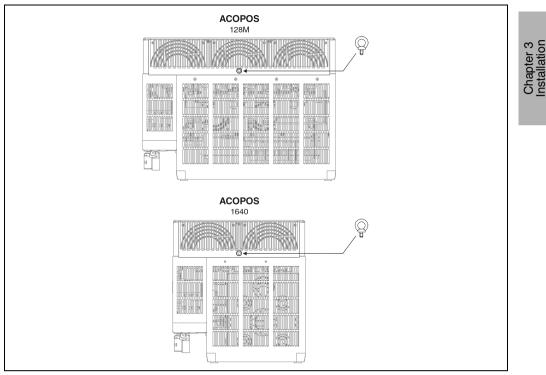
Attaching the ring screws contained in the delivery to ACOPOS 1640 and 128M drives
